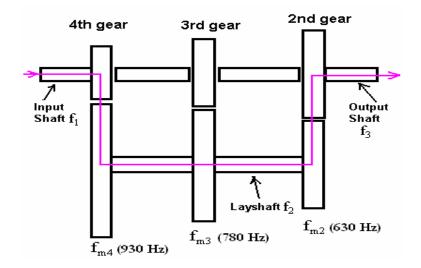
Gearbox details showing various frequencies and power transmission during 2<sup>nd</sup> gear operation.
